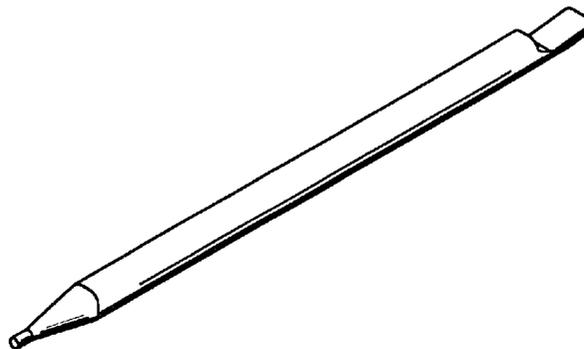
is a perspective view of the test kit specimen-handling tool of the present invention.
